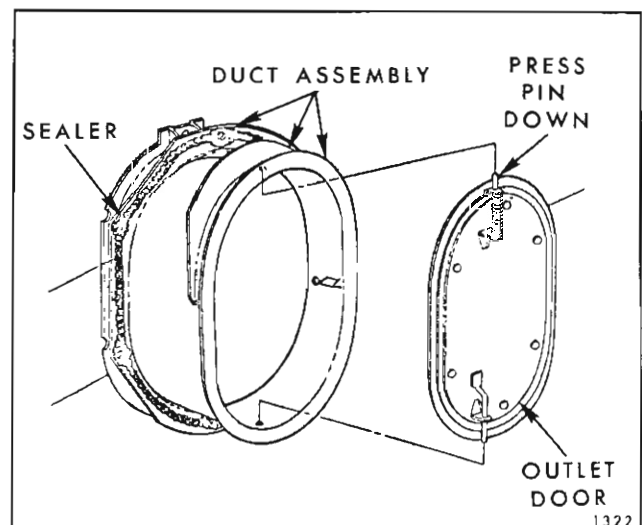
C14—Shroud Side Air Outlet Duct Assembly and Sealing
